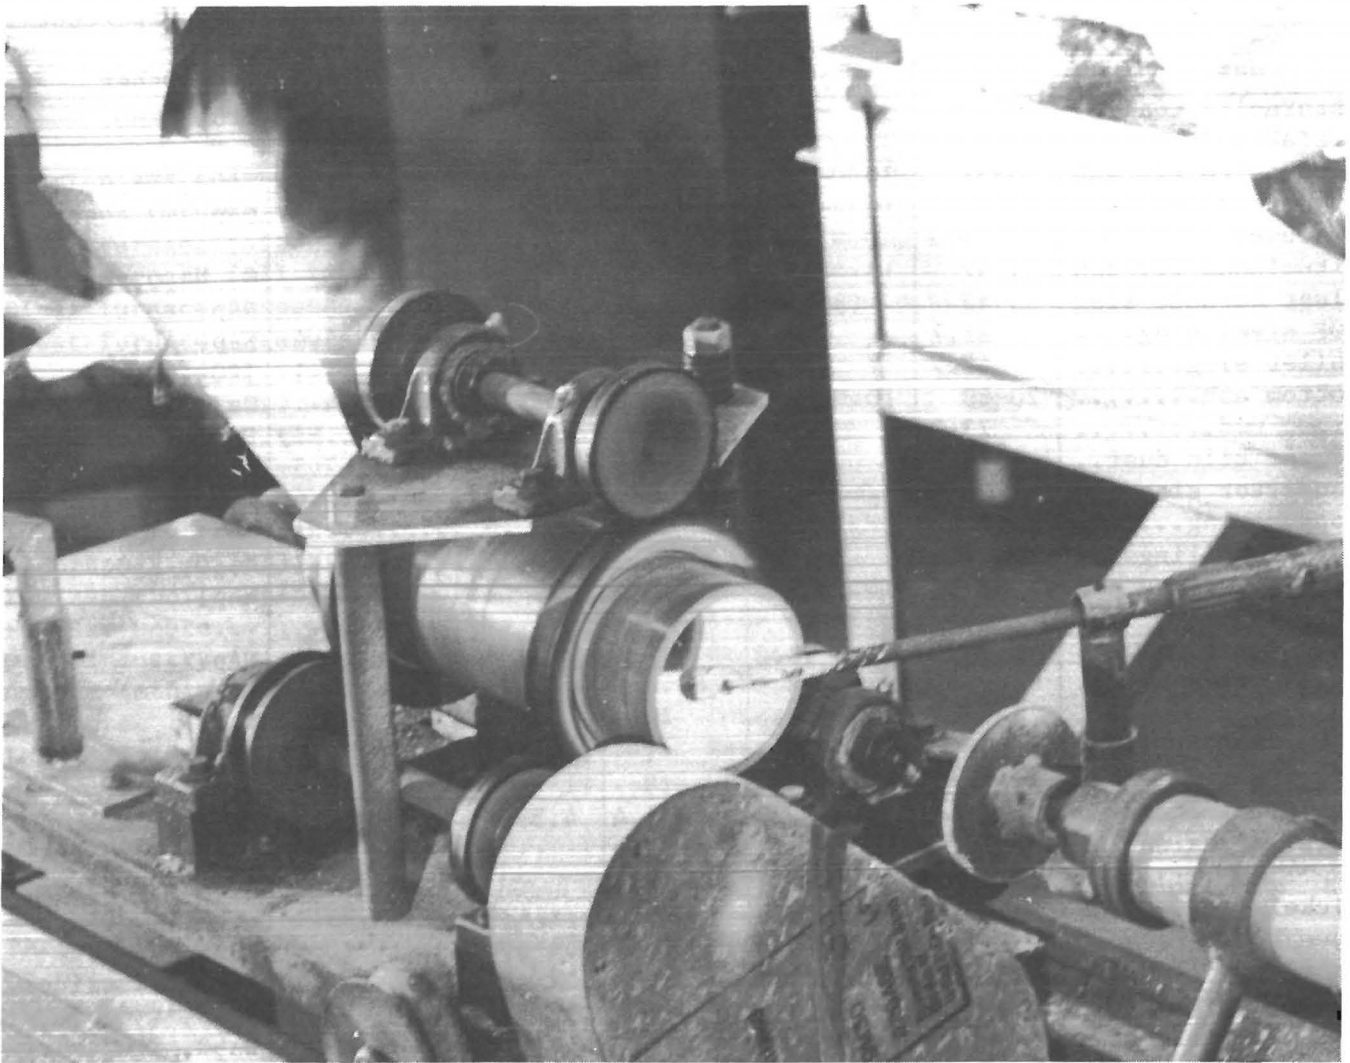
Centrifugal casting apparatus used to produce glass-ceramic pipe.
